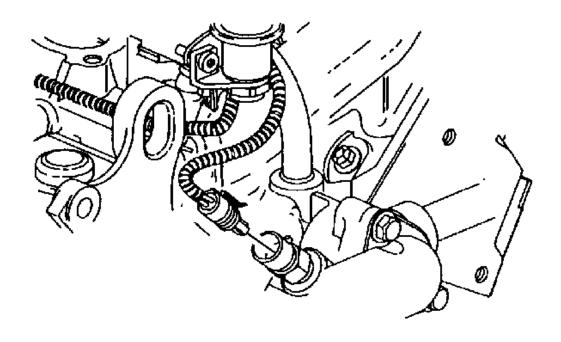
Installing Fuel Injector & MAP Sensor Wiring Harness Courtesy of GENERAL MOTORS CORP.
